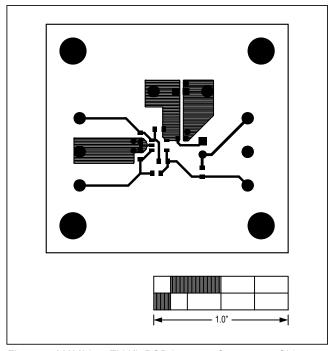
MAX9647 EV Kit PCB Layout—Component Side
